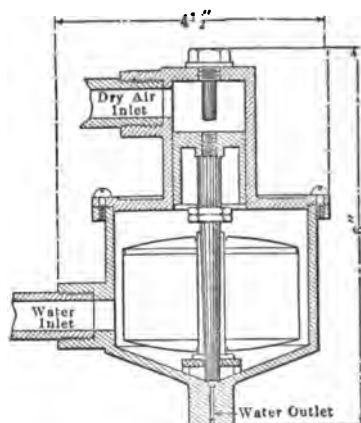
EJECTOR VALVE FOR AIR LINE.
